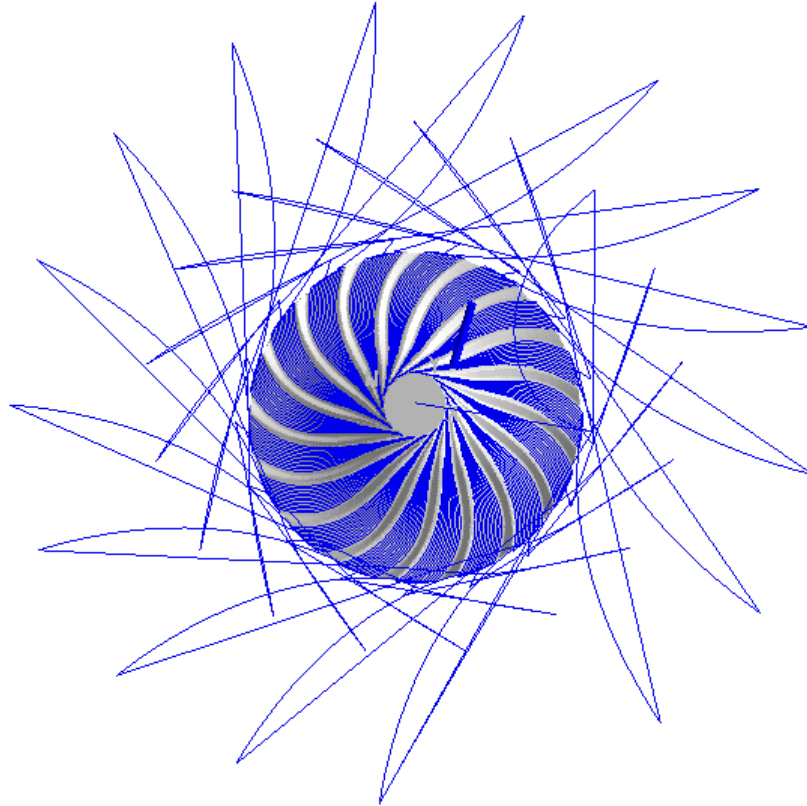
The cutting tool, the toolpath, and the workpiece for 5-axis CNC cutting
